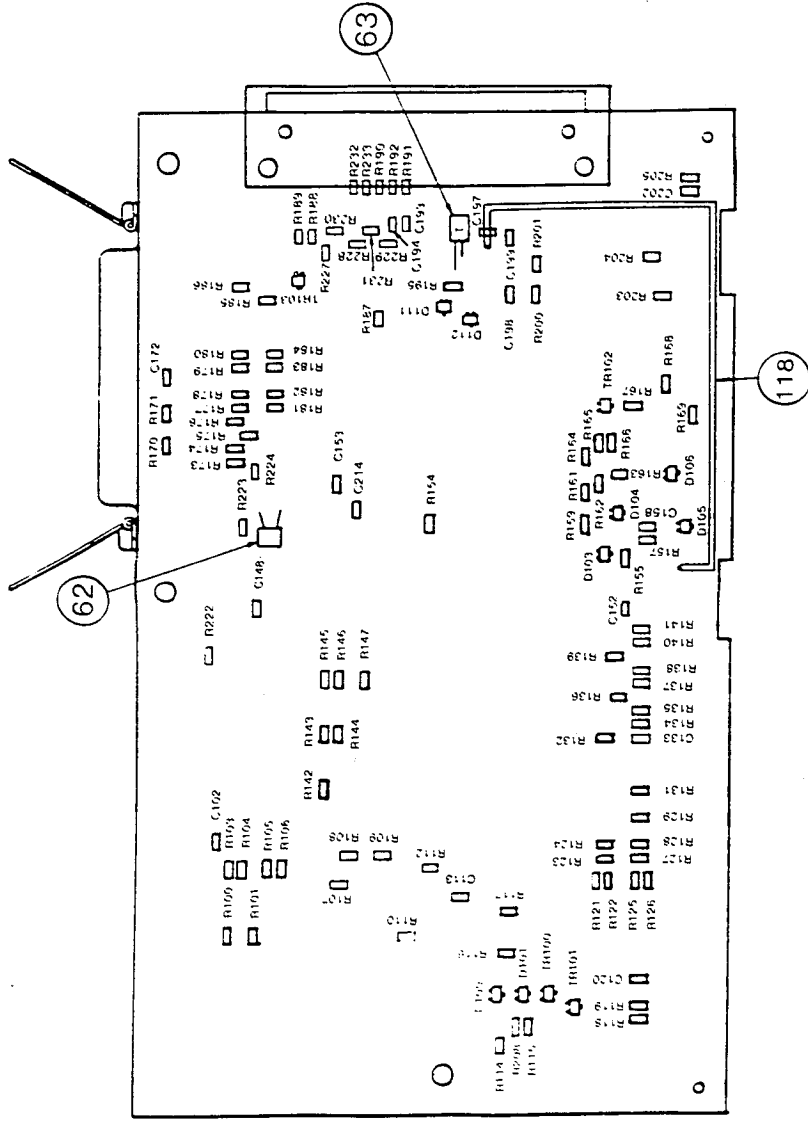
(5/5) SLMC – 2 Printed-Circuit: Board (4YA4021-1001Gxxx) (Rev.5)
